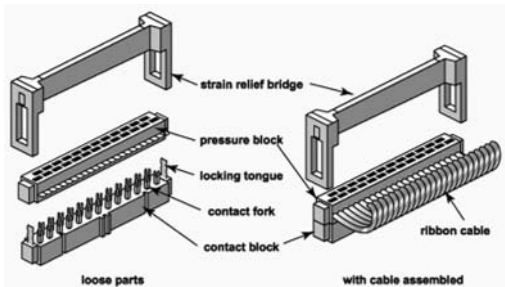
Assembly procedure for flat ribbon cable connectors
